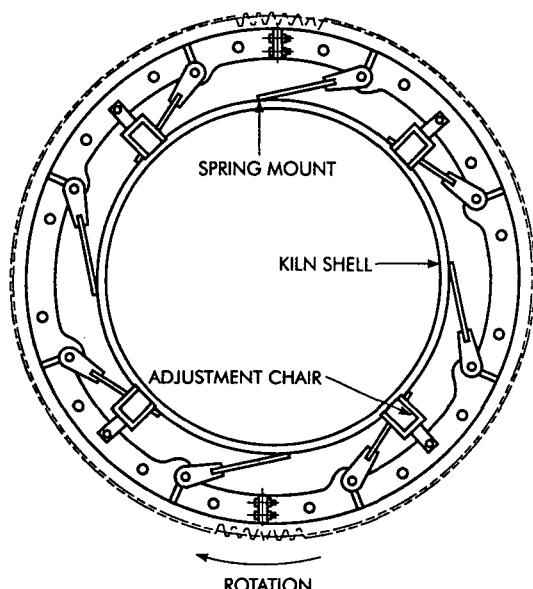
TYPICAL SPRING MOUNT ARRANGEMENT
